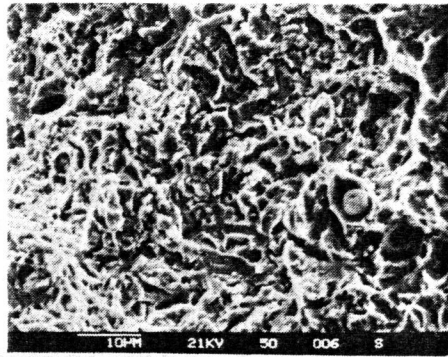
Fracture mode in HAZ of cross-weld joint sample
